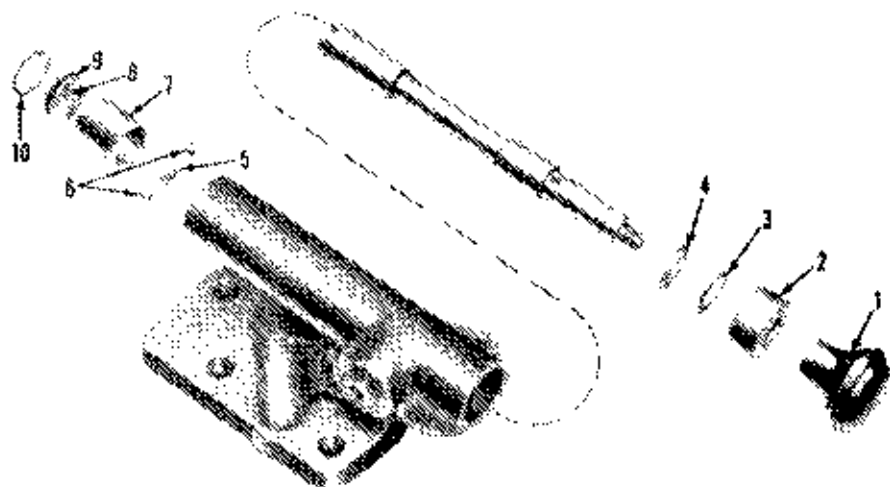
Exploded view of "Selec-trol" valve that was available as an accessory for NAA tractors. Valve permits operation of single acting remote cylinders from tractor lift system control valve.
